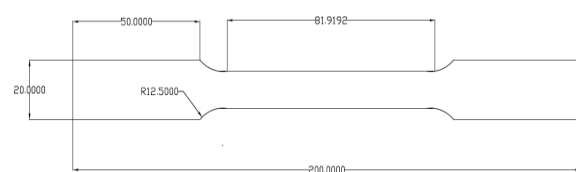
Drawing of tensile sample according to standard ASTM E8/E8M-13a
